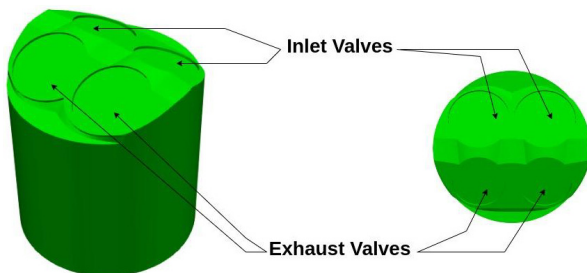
Isometric-view (left) and top-view (right) of exhaust and inlet valves of pent-roof 4-valve engine.
